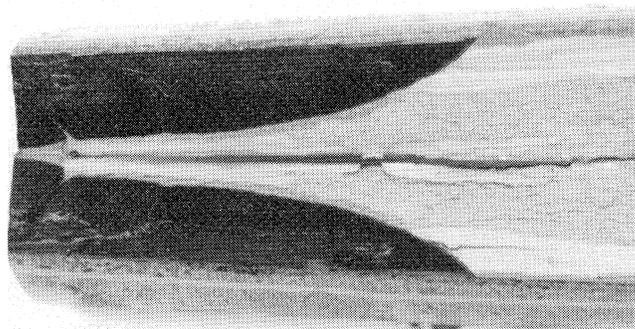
Macro Photograph of a Section of a Forging/Rolling Lap.
